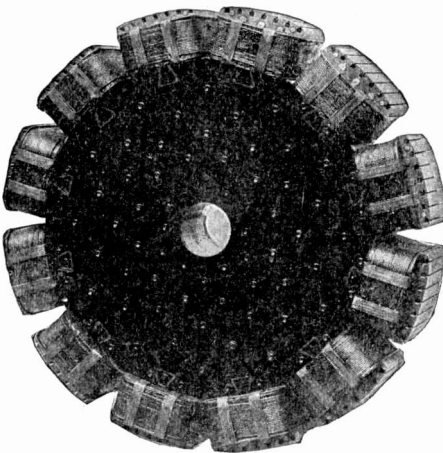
Rotor of Fig. 169 with Field Coils in Place
